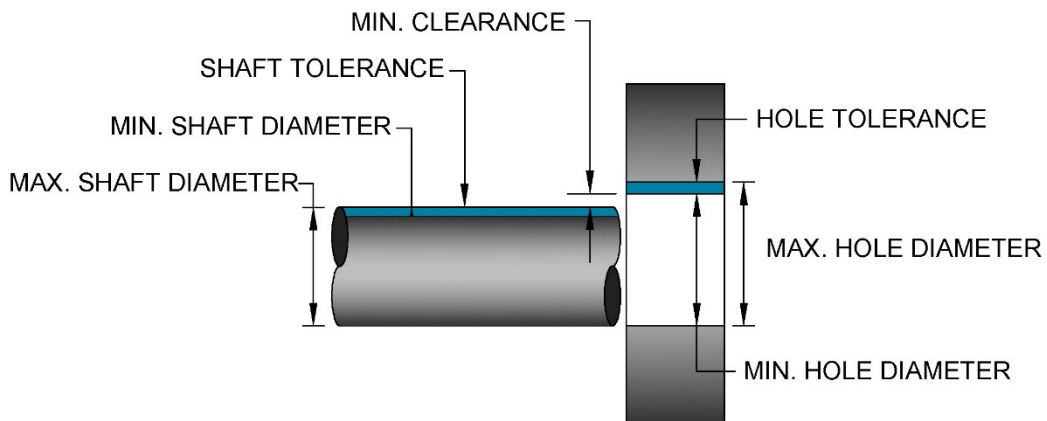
A clearance fit occurs when there is positive clearance between the hole and the shaft.
